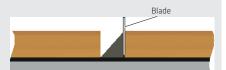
Third cut using blade in right of cut at 90 $^{\circ}$
